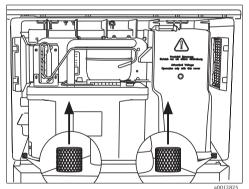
Remove the bolts on the bottom left and right on the rear of the dosing compartment
